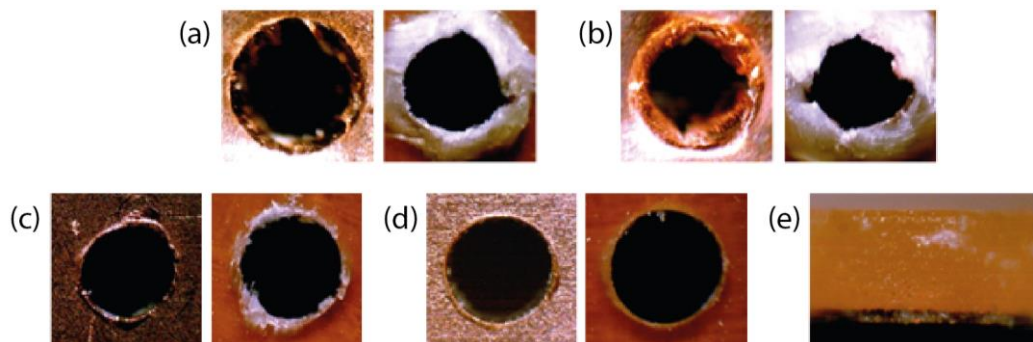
Photos of holes: (a) drilled then pierced; (b) pierced; (c) manually drilled; (d) drilled on a CNC milling machine; (e) drilled on a milling machine, side view of the hole.
